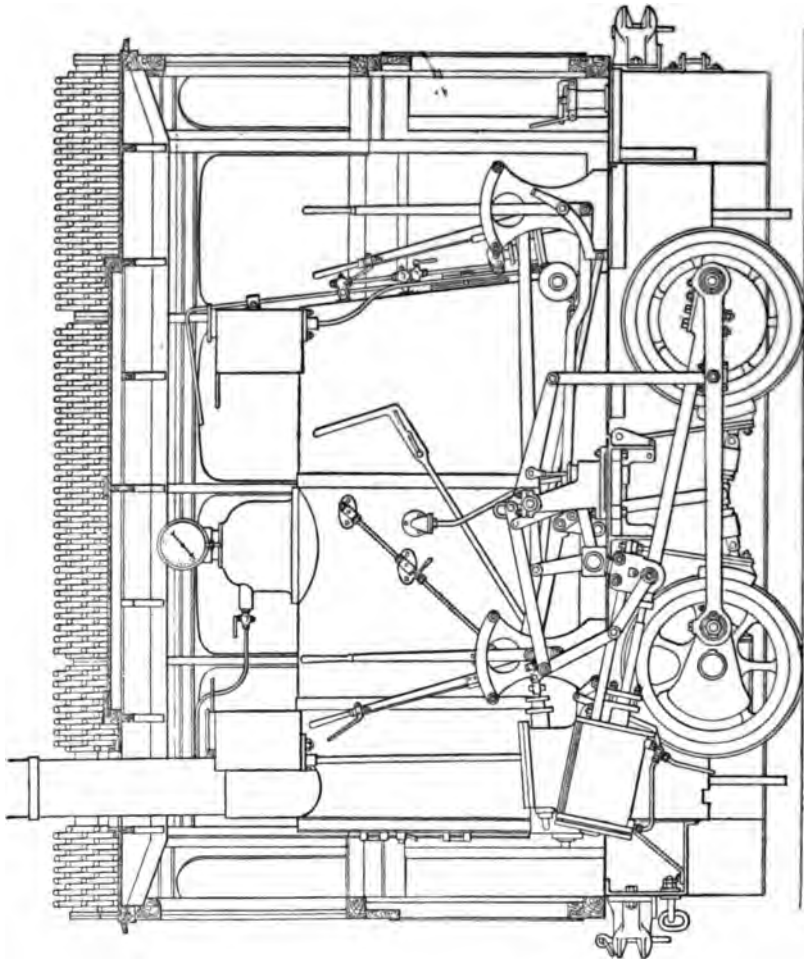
Tramway Locomotive, designed and constructed by Kitson & Co. Longitudinal Elevation. Scale 1/30th.
